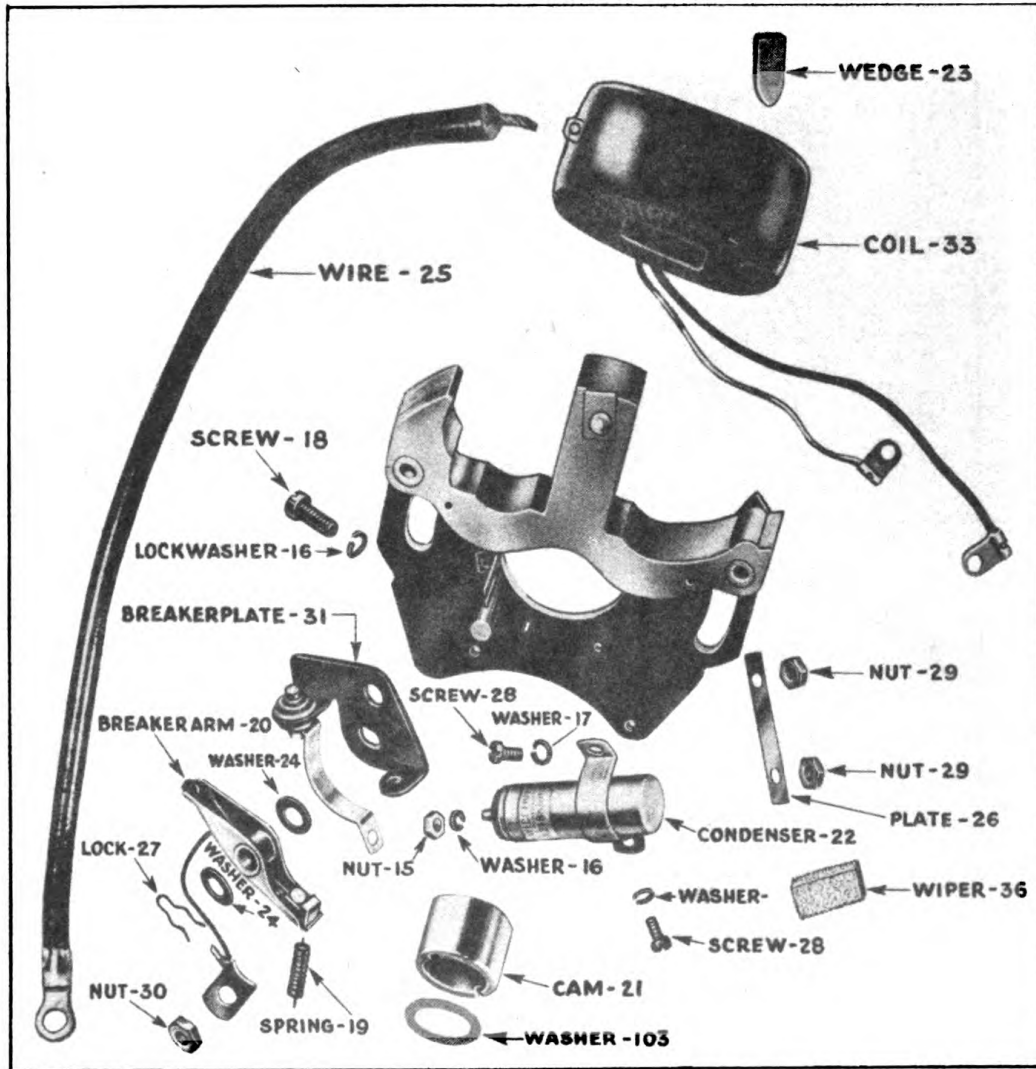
MAGNETO STATOR PLATE ASSEMBLY
